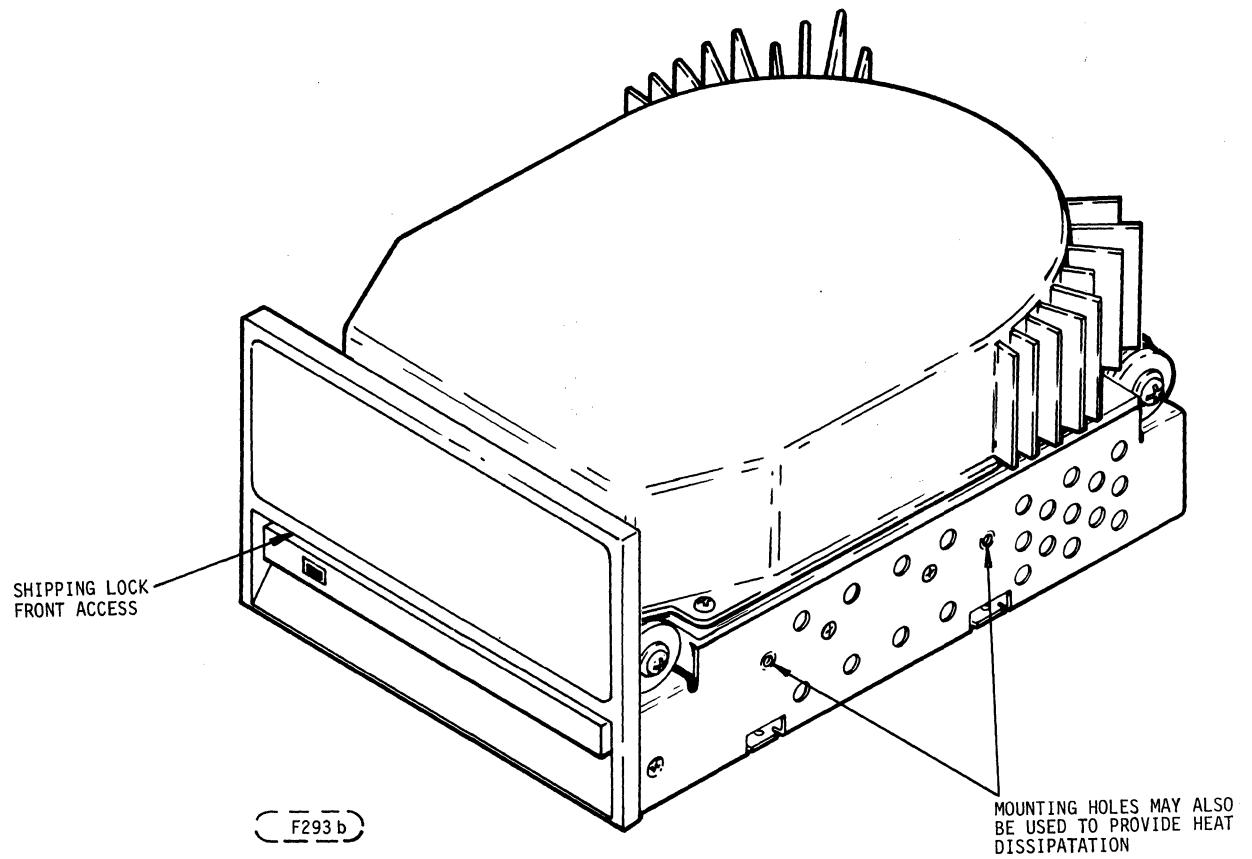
HEAT SINK MOUNTING HOLE LOCATION
